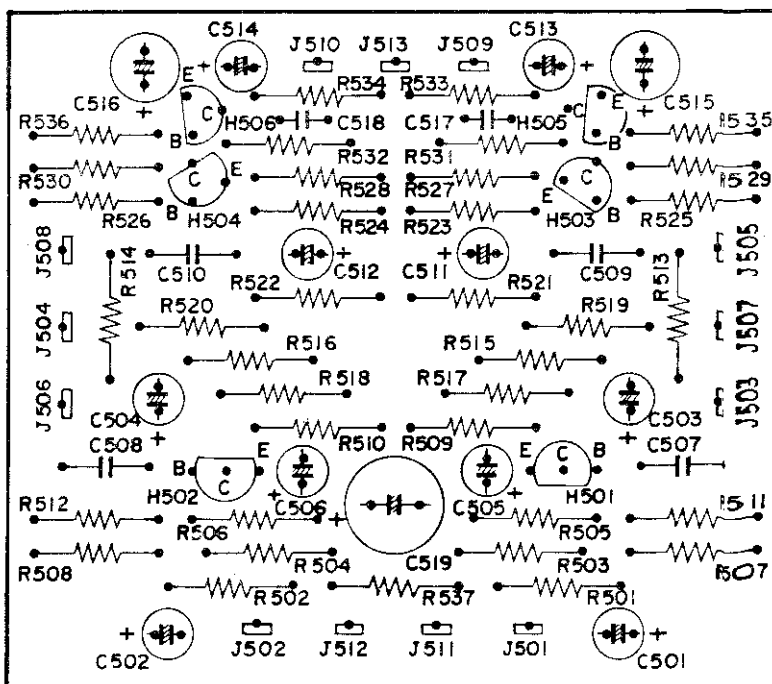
Vari-Matrix Unit Assembly P500 Component Locations
